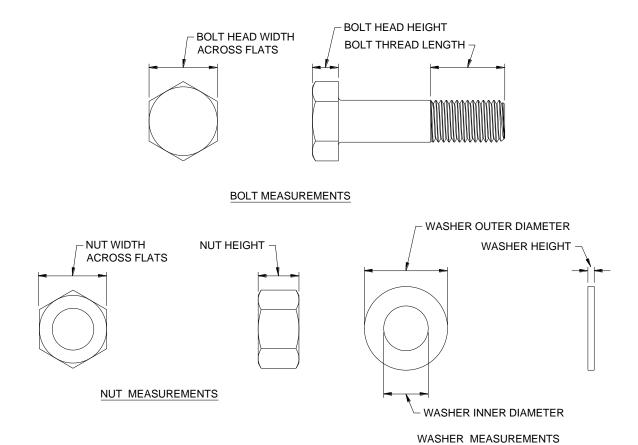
Drawing of Dimensions Recorded on Corrosion-Resistant Bolts, Nuts, and Washers
